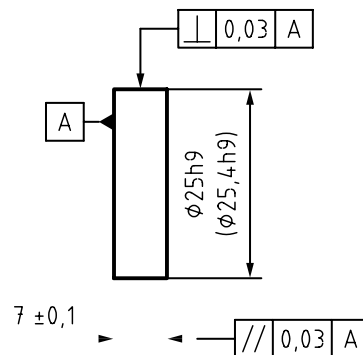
Dimensions and tolerances for test disc with rated diameters 25,0 mm and 25,4 mm
